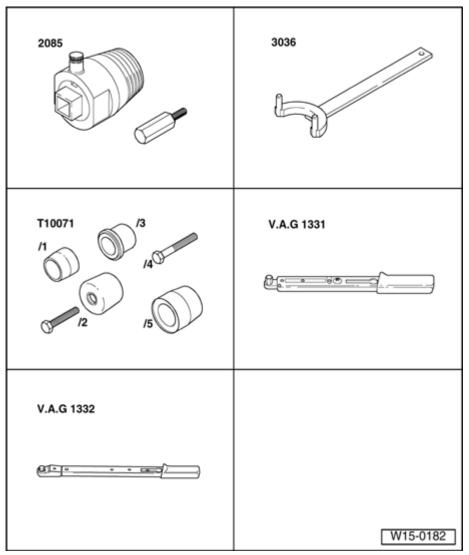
Identifying Special Tools - Oil Seals For Camshafts, Replacing Courtesy of VOLKSWAGEN UNITED STATES, INC.
